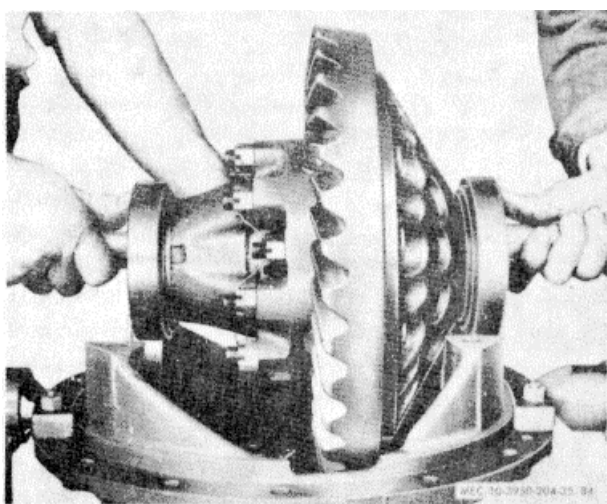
Differential and gear assembly. differential bearing cones and cups with specified rear axle lubricant.
